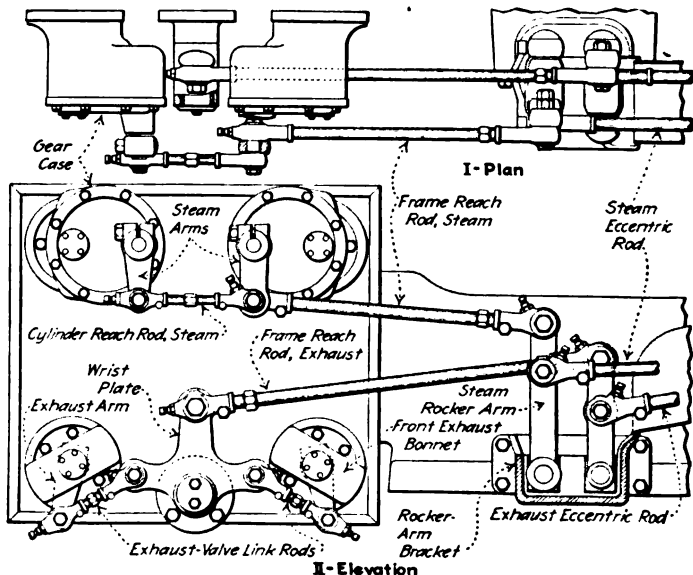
Plan and valve-gear side elevation of Ball four-valve (Corliss) engine with exhaust wrist plate. (Eric Ball Engine Co.)
